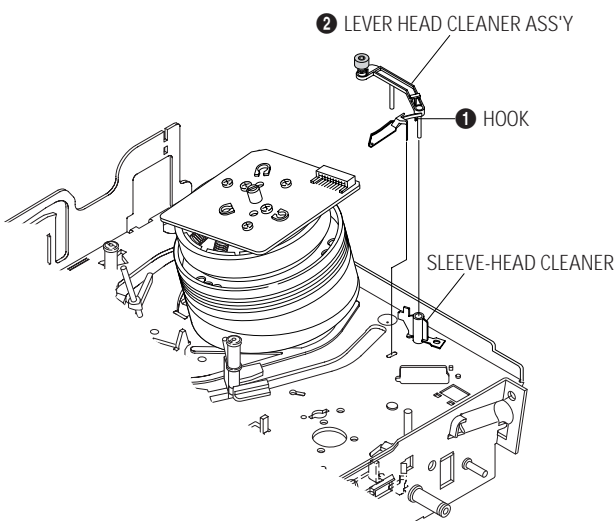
Lever Head Cleaner Ass'y Removal
